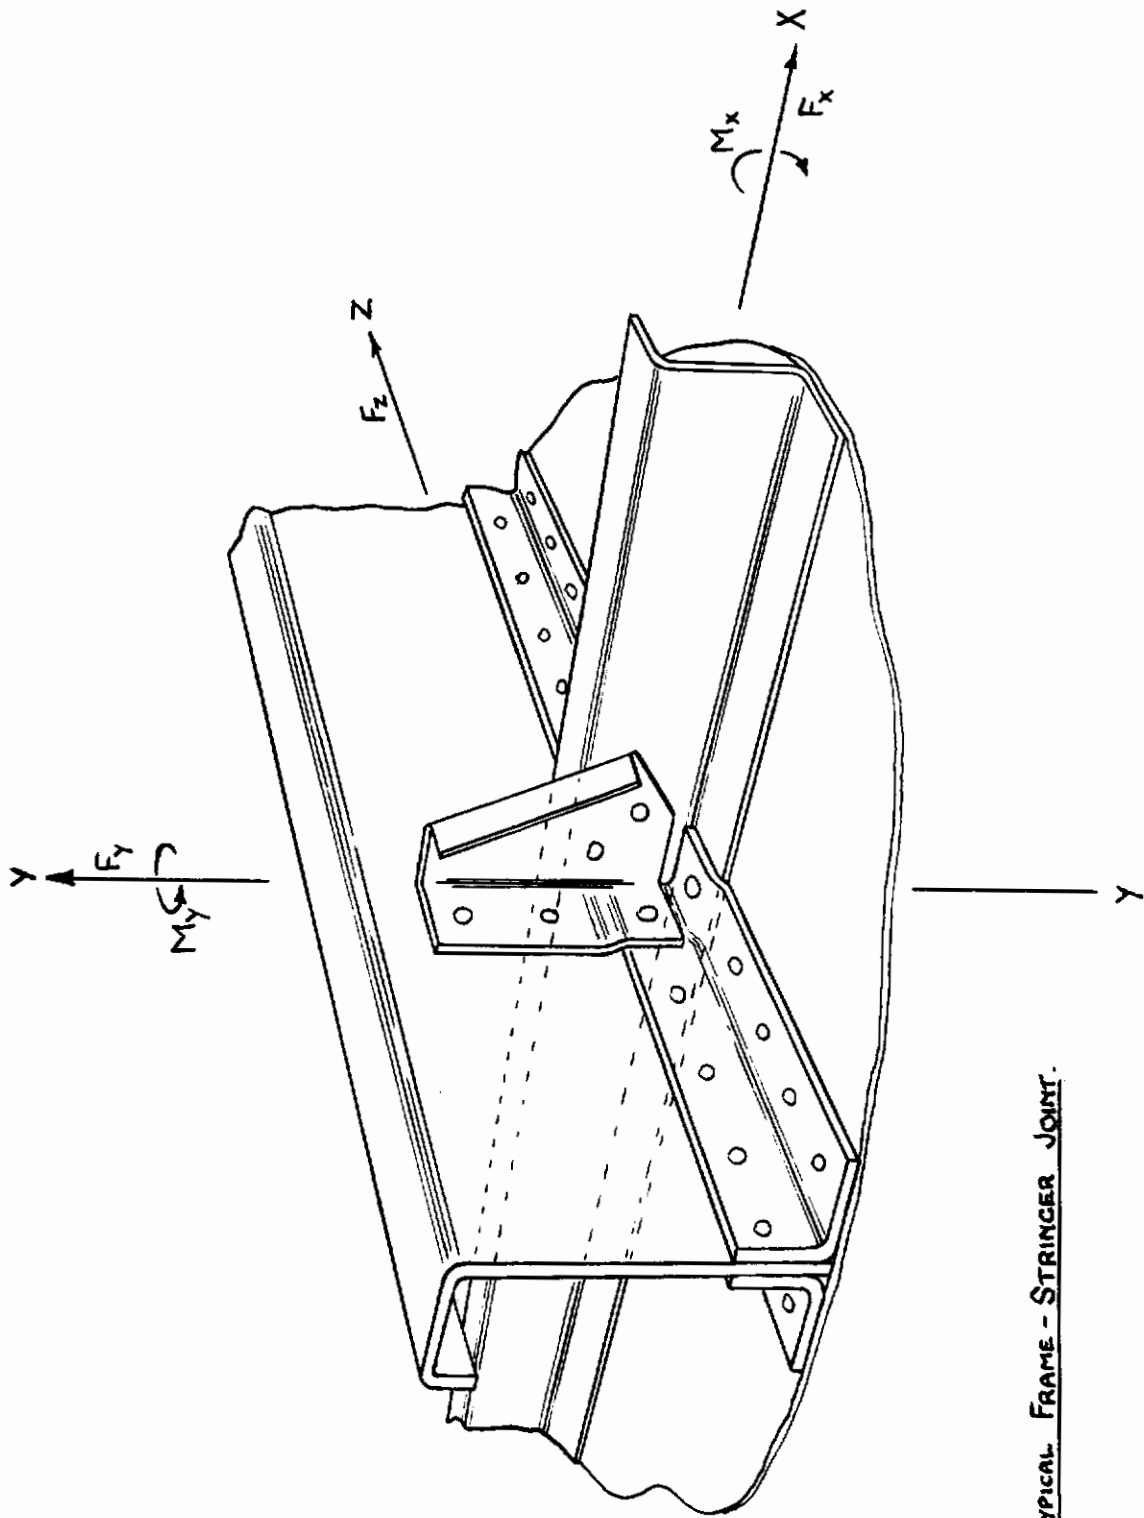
TYPICAL FRAME - STRINGER JOINT.
